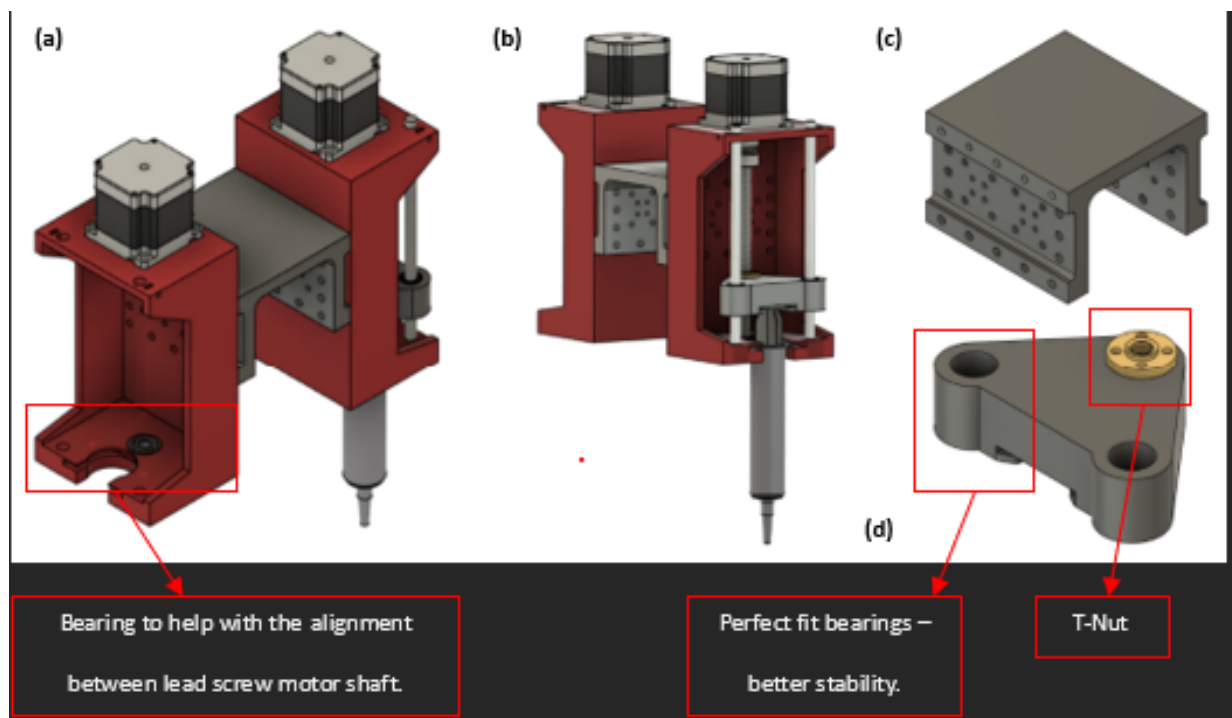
3rd Design Iteration: (a) Front Side - Full Assembly of the Extruder on Fusion360, (b) Back Side - Full Assembly of the Extruder on Fusion360, (c) U-Bracket, (d) Plunging Driver
